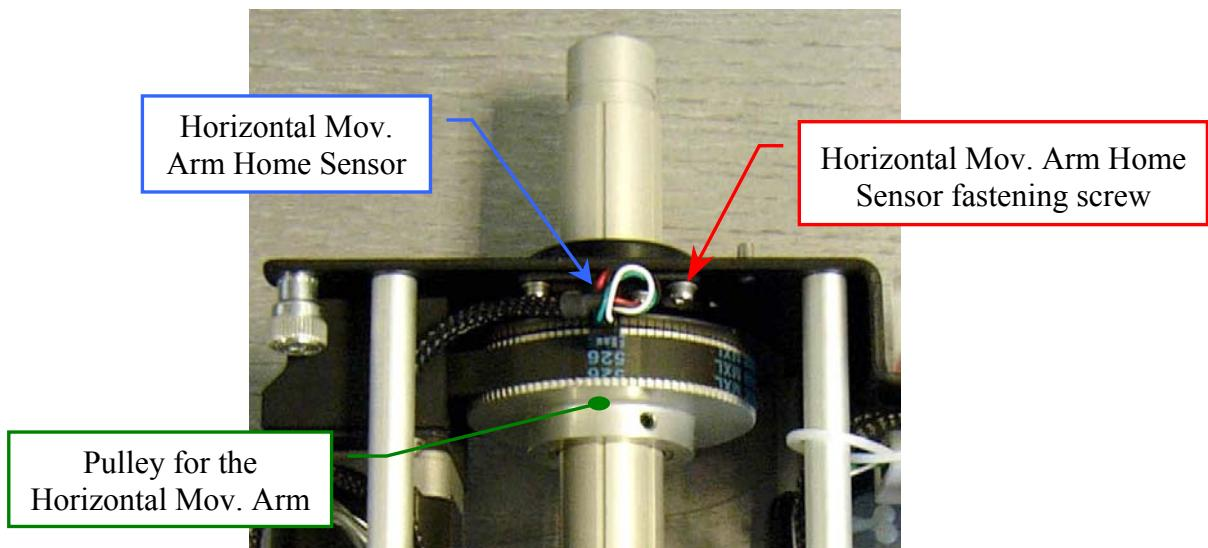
Horizontal Mov. Arm Home Sensor fastening screws
